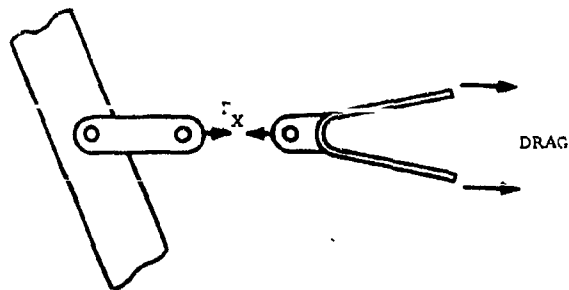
FLAMEHOLDER RING MOUNTING ARRANGEMENT
